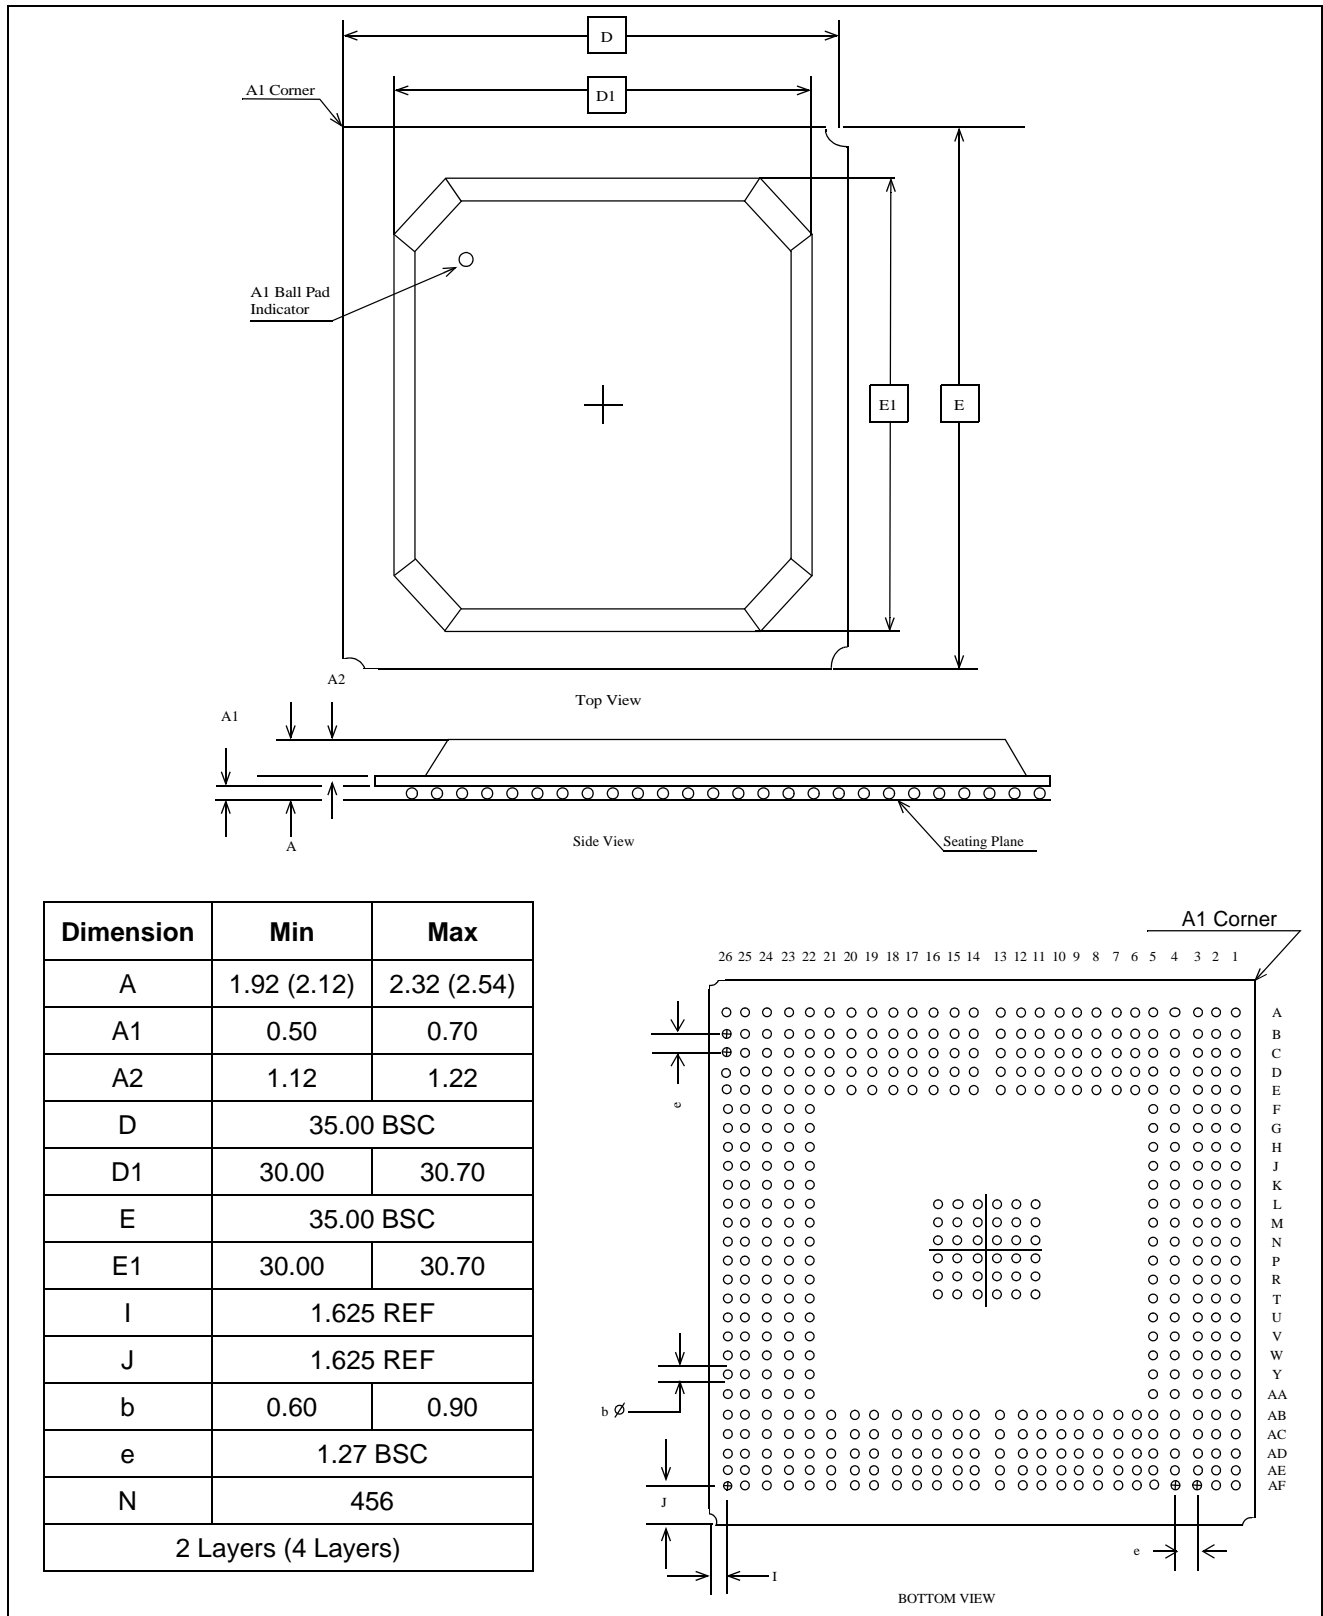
MT90502 Package Outline Drawing (456 PBGA)
